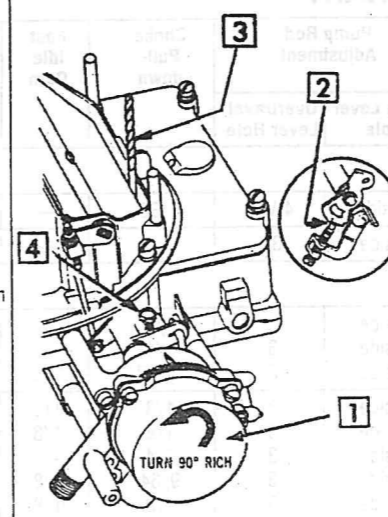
FAST IDLE CAM ADJUSTMENT
